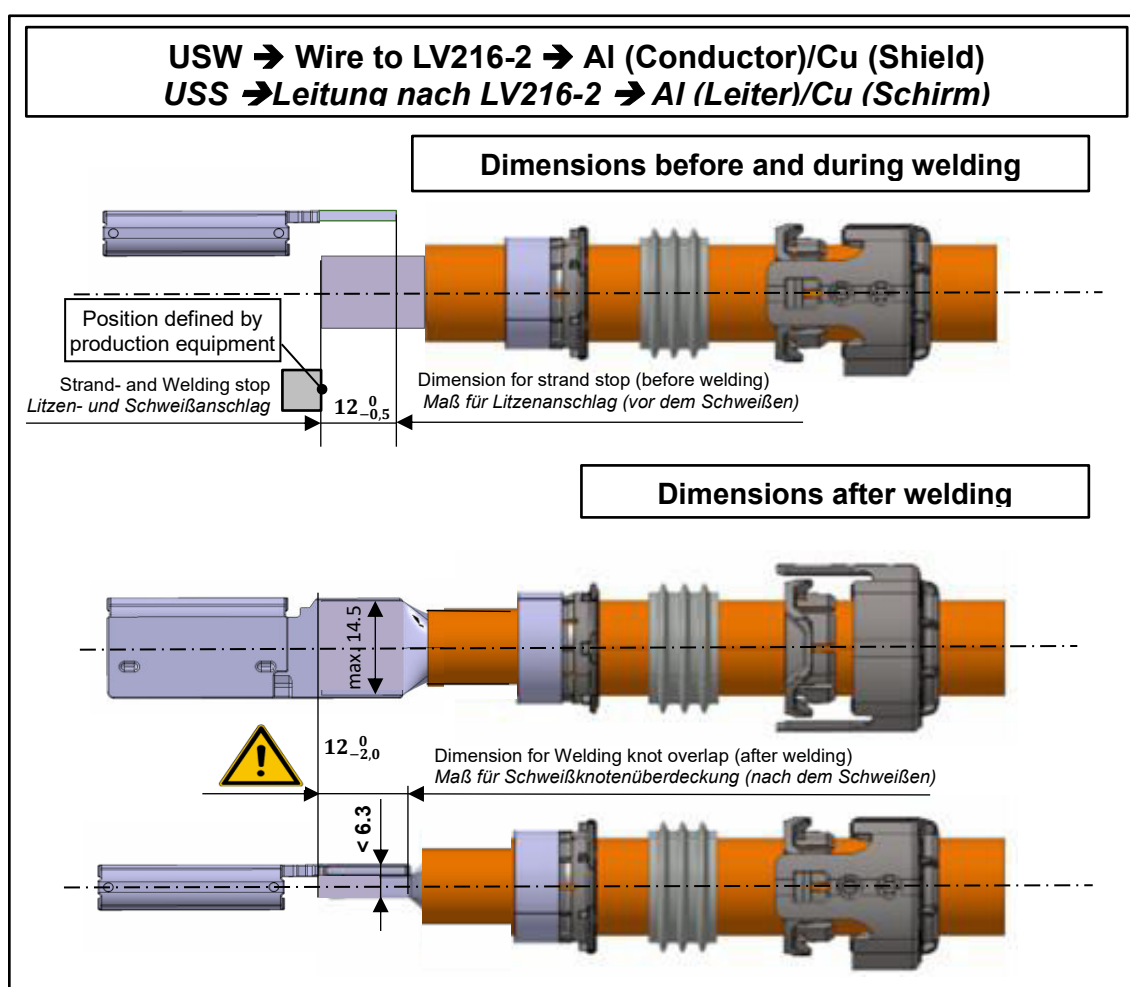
Dimensions to ultrasonic welding; Al-Conductor (as an example for 50 mm²)
